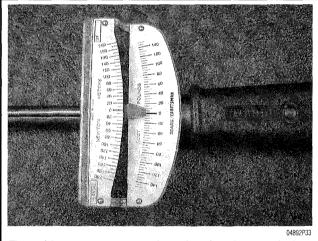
A beam type torque wrench consists of a pointer attached to the head that runs the length of the flexible beam (shaft) to a scale located near the handle
